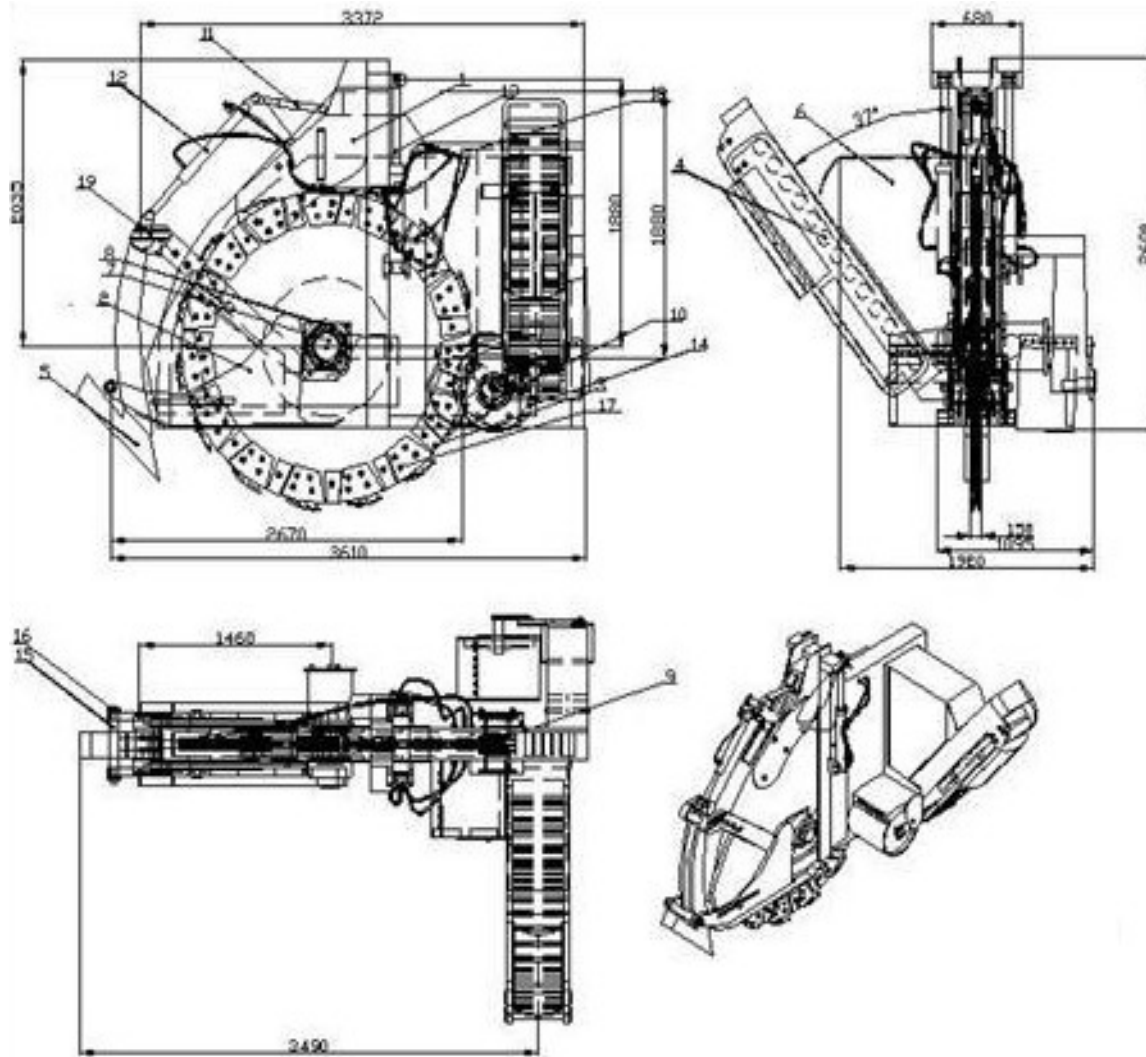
Assembly 2D drawing of trencher equipment with milling disc:
